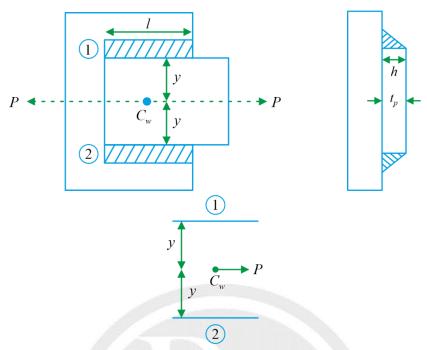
Symmetrically loaded Parallel fillet weld
